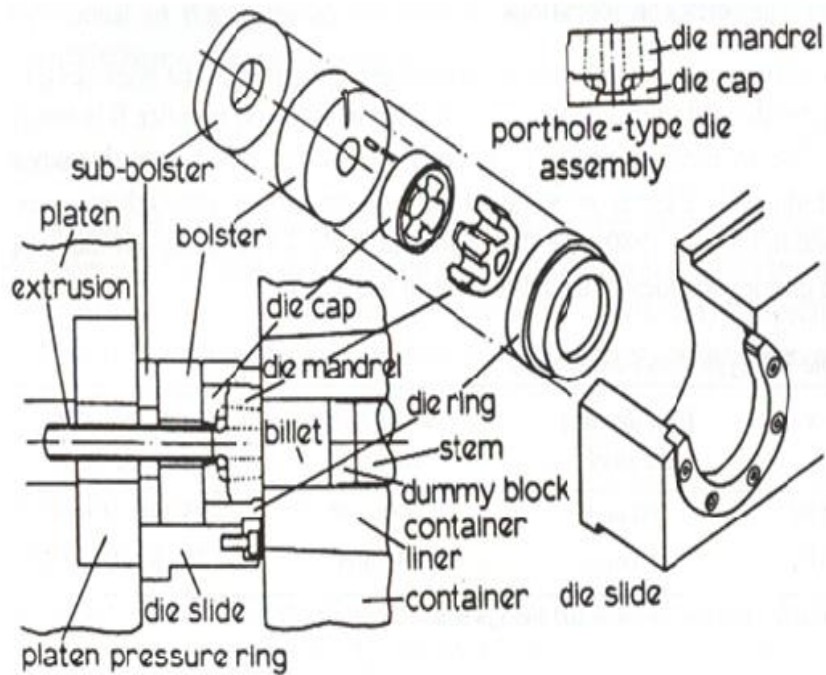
A typical tooling arrangement for aluminium hollow sections (Sheppard 1999a, p.359)
